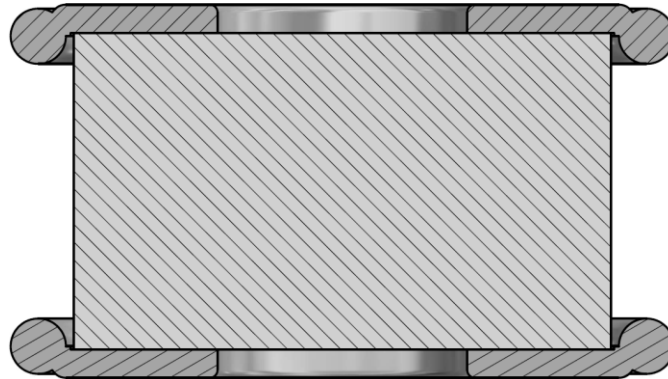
A conceptual cross section of a 2 cm thick capacitor prototype employing the machined version of the second iteration field shaper.
